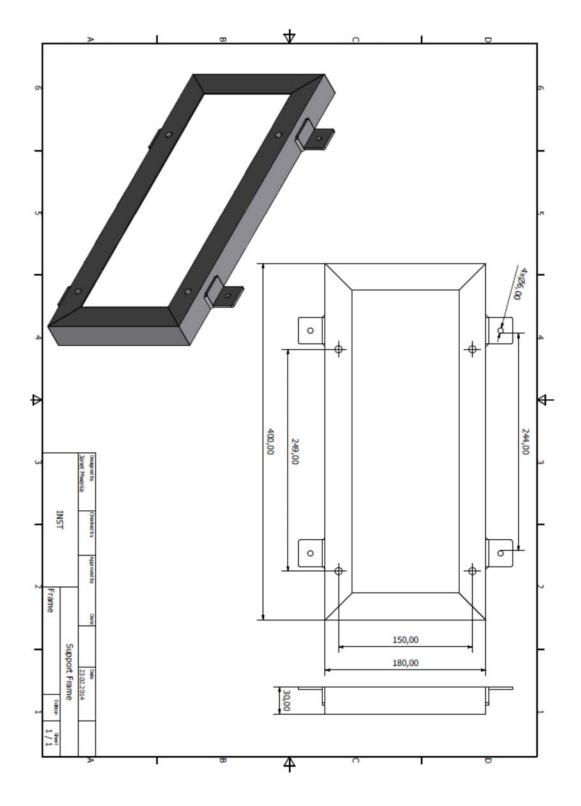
The Injection Machine Support Frame 3D image and plan elevation showing dimensions
